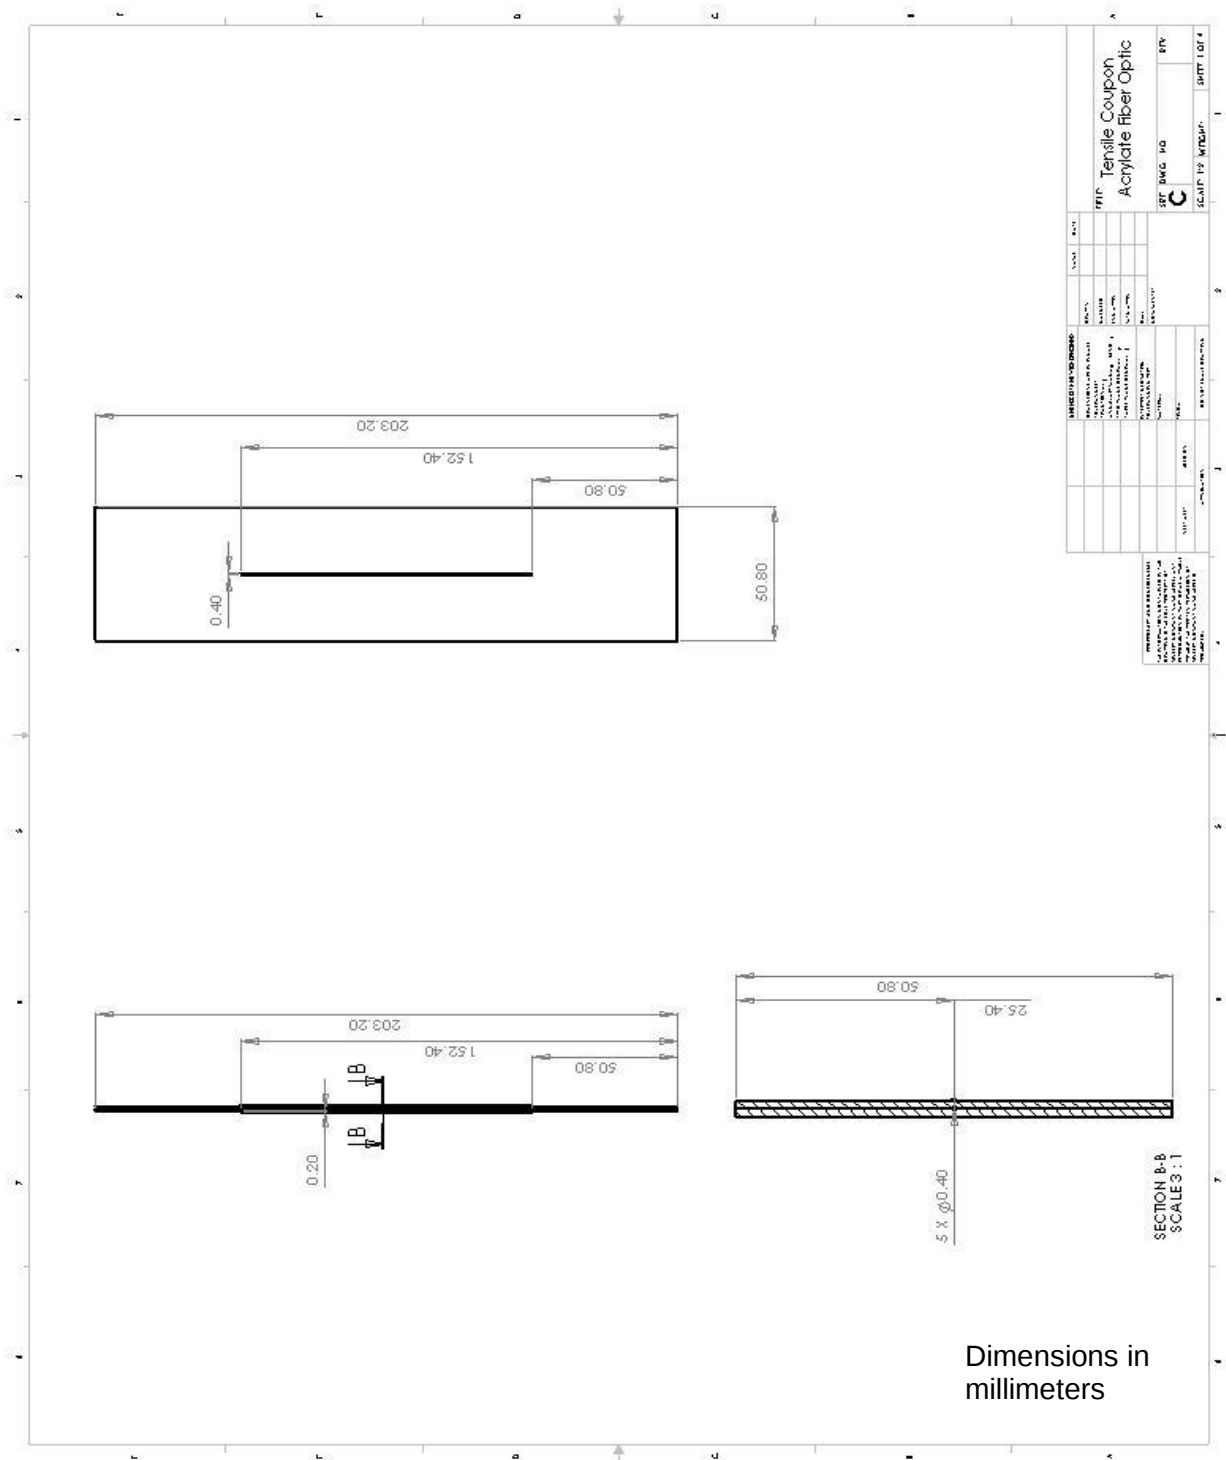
Dimensions for the tensile coupons with embedded acrylate coated fiber optics.
